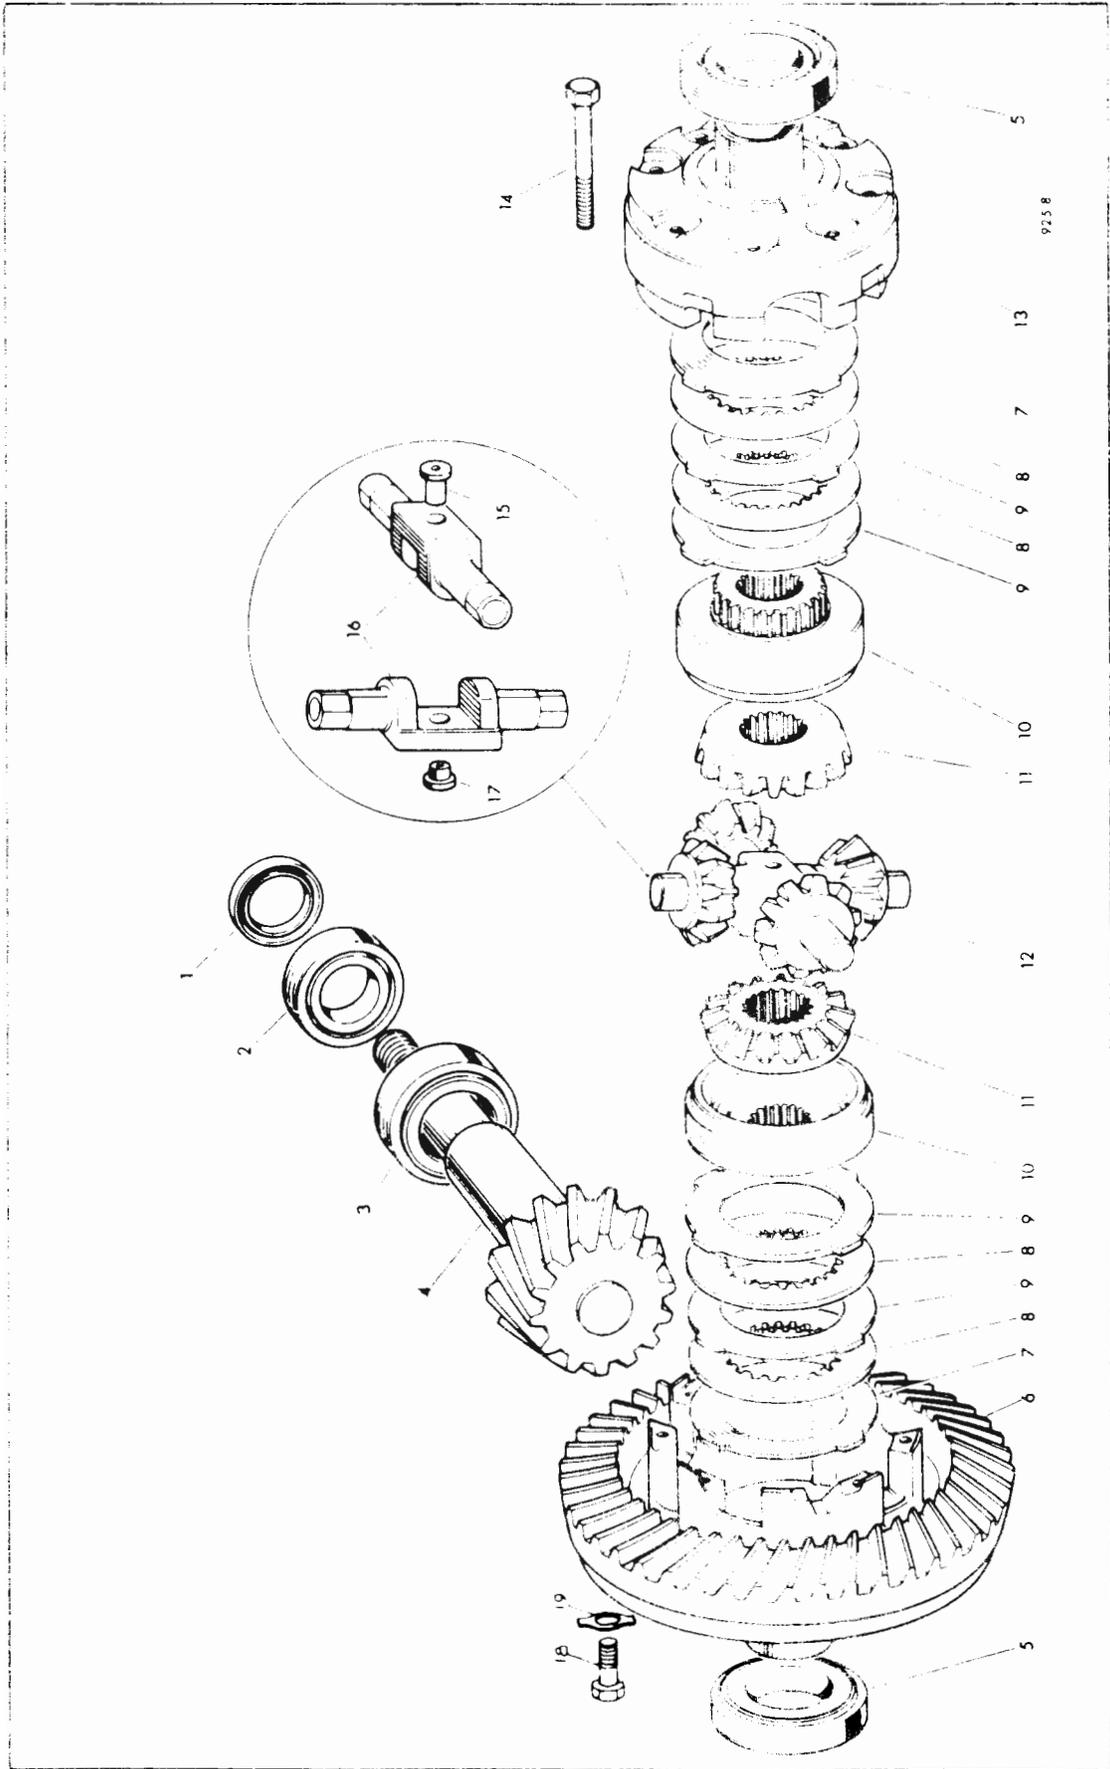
'POWER-LOK' DIFFERENTIAL & DRIVE GEARS
